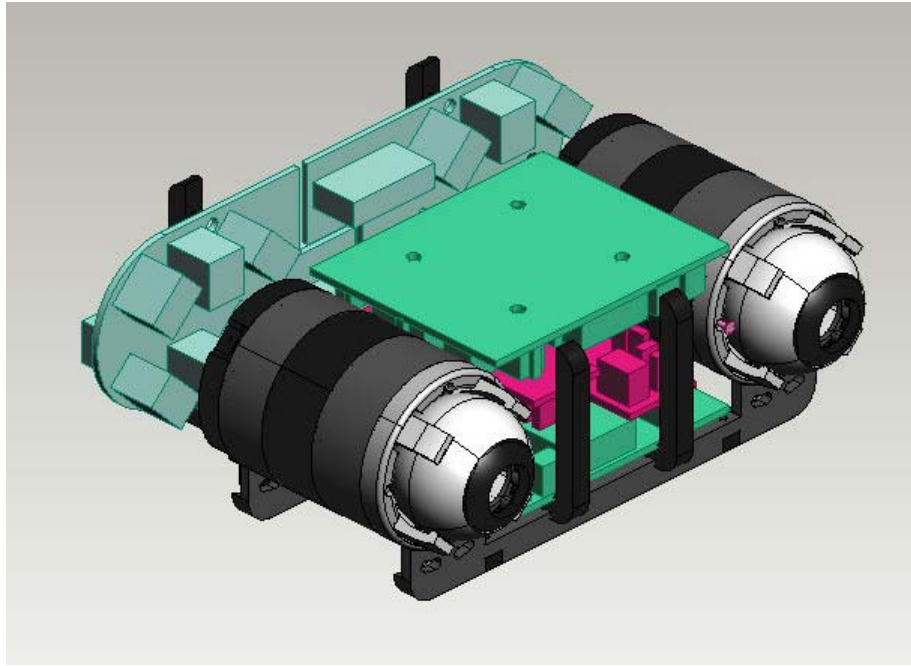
MAC Eye assembled prototype (summer 2004)
